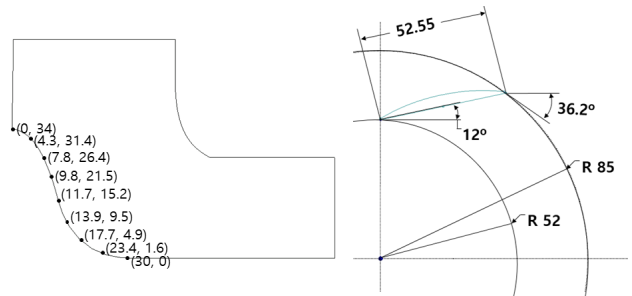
Meridional plane with the hub configuration and schematic drawing of the fan and impeller
